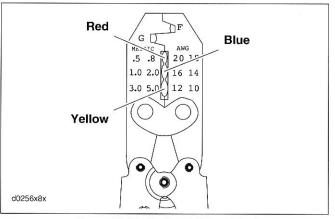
Packard Crimp Tool (Part No. HD-38125-8)
